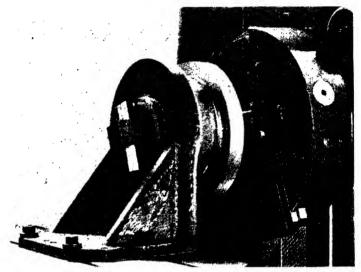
Back facing the same piece with a tool driven by the toolhead.
